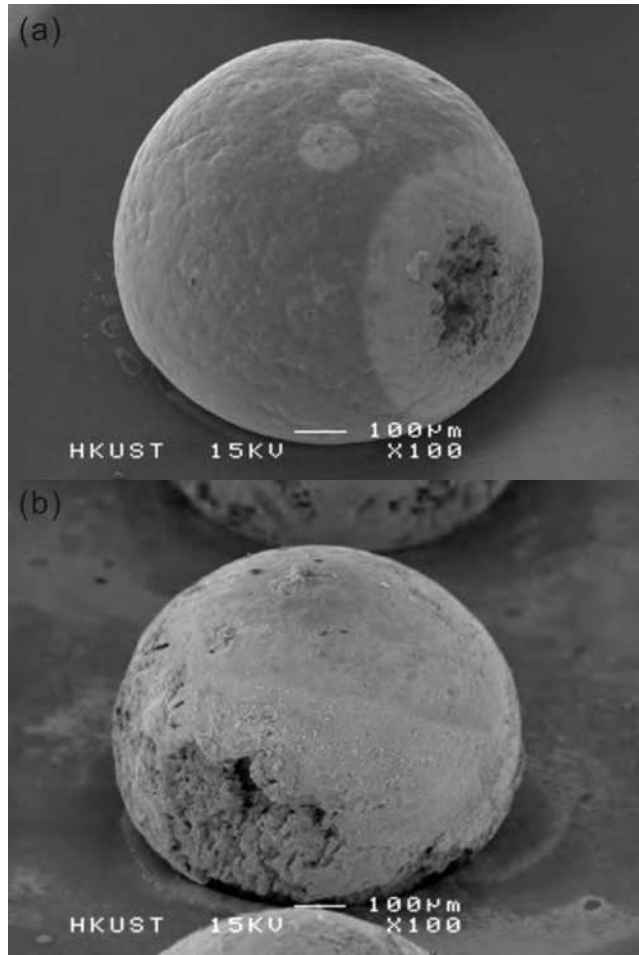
Surface morphology changes of solder balls after the salt spray test for 96 hrs: (a) Sn-Pb solder, and (b) SAC solder[39].
